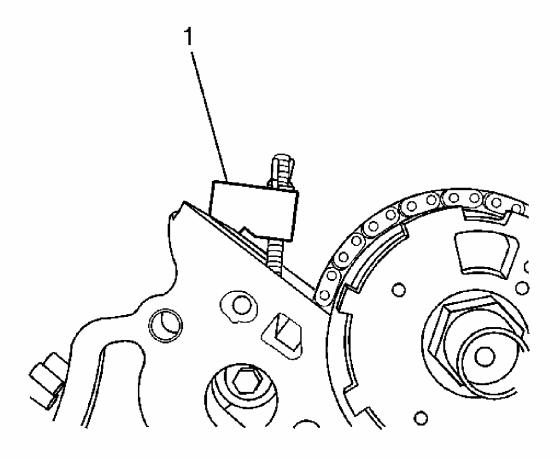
Positioning Top Retention Tool On Cylinder Head Courtesy of GENERAL MOTORS CORP.
